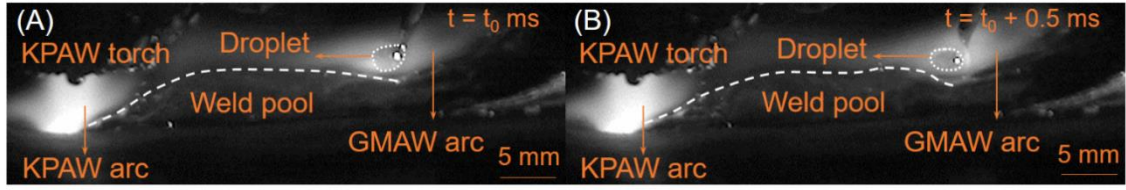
The high speed photographs of droplet and weld pool in the hybrid KPAW-GMAW process
